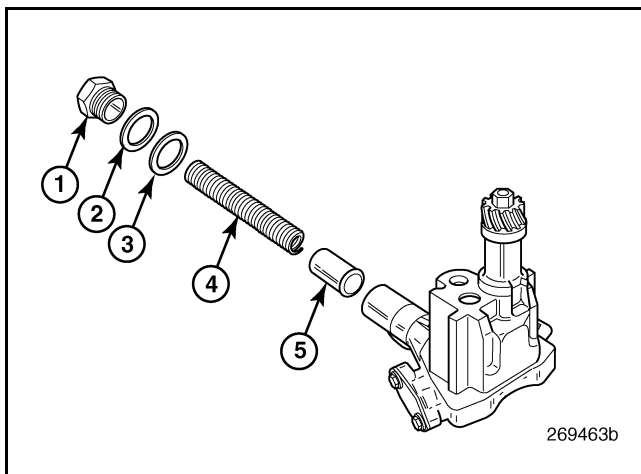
Oil Pump Pressure Relief Valve Spacers
